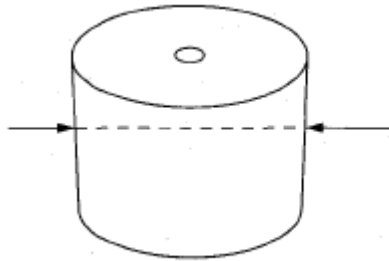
Identifying Intake And Exhaust Valve Oil Seal
